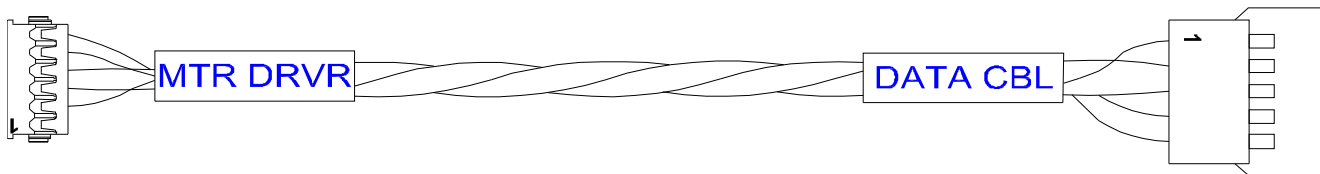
VL4000 Data Network Extension Cable Assembly
